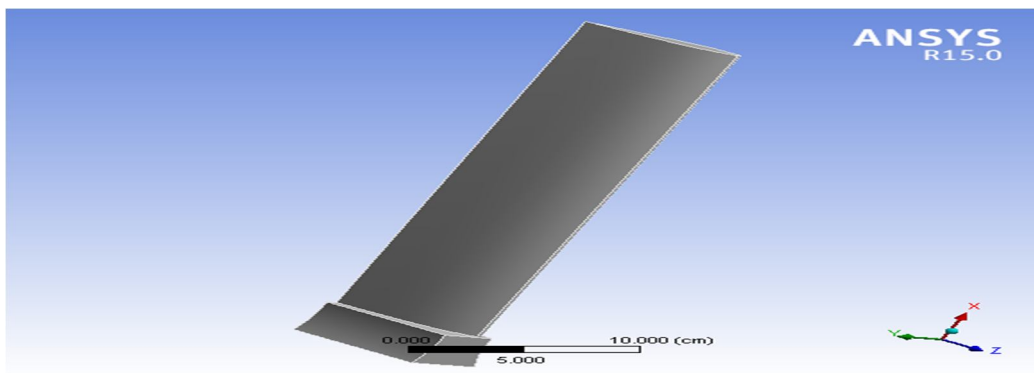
CAD Model of Compressor blade with  $12.5^{\circ}$  angle
